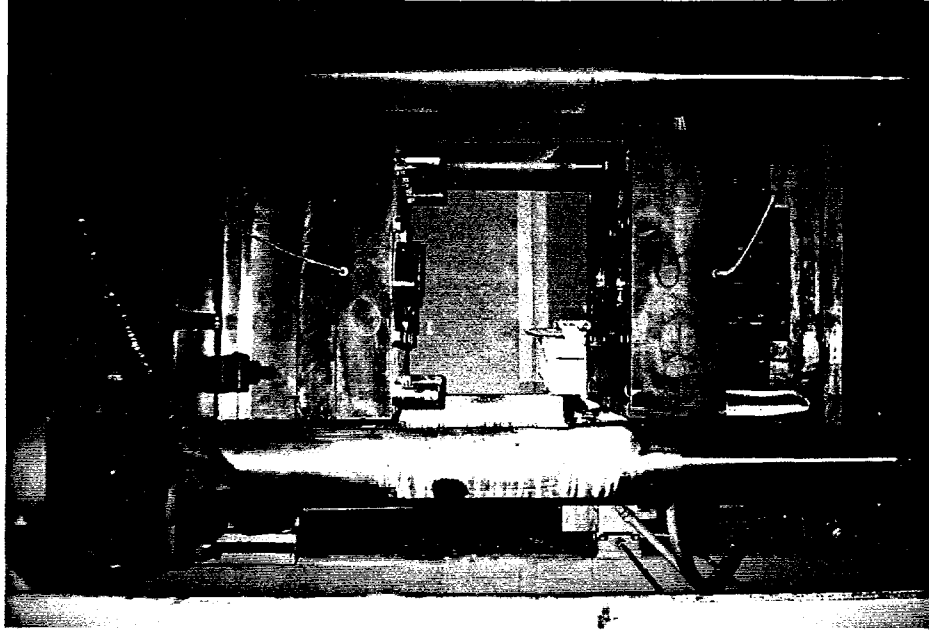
Close-up of dies used for prototype production of motor mount bracket by metal compression forming.
